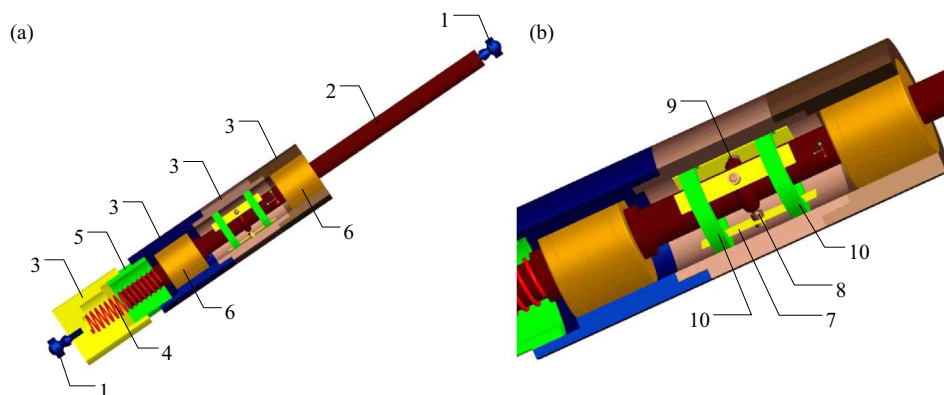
Schematic diagram of the QZS strut at the static equilibrium position. (a) Internal configuration; (b) a partially enlarged view. 1 ball joint, 2 rod, 3 sleeve, 4 coil spring, 5 adjuster, 6 linear bearings, 7 flexible beam, 8 roller fixed on the beam, 9 cam fixed on the rod, 10 holder of flexible beams.
